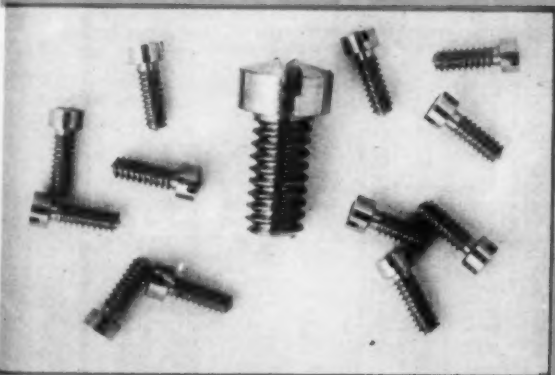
No. 0-80 machine screw compared with miniature fillister-head screws of 0.60-mm (0.0236-in.) major thread diameter.
